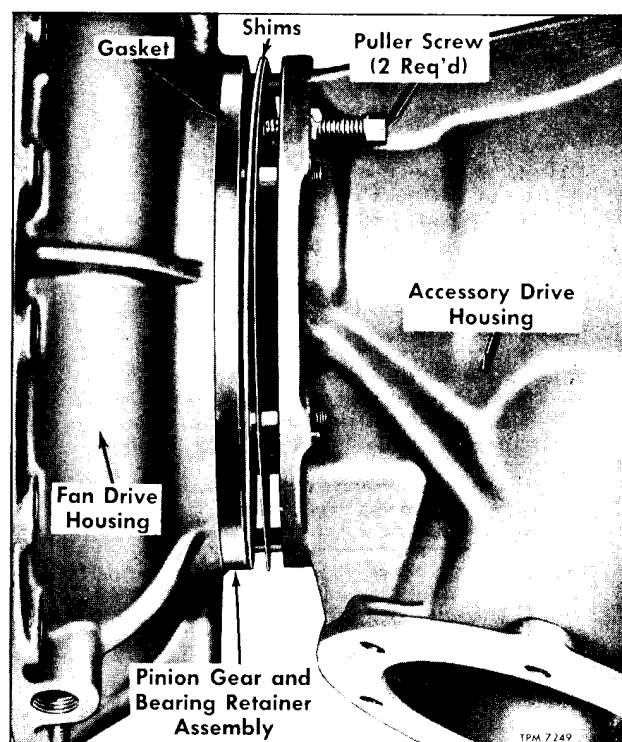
Shims Installed Between Drive Housing and Pinion Gear Retainer
